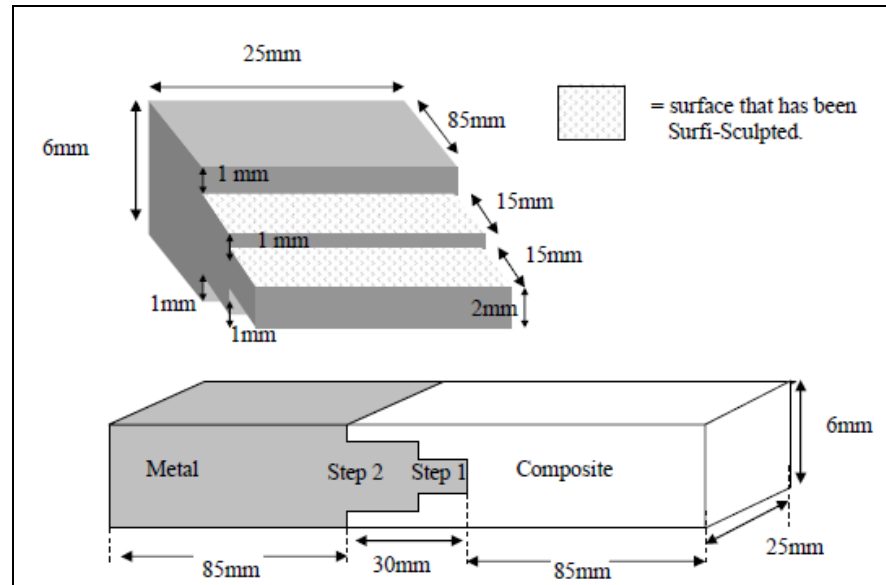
Schematic drawing showing the dimensions of the Comeld™ double step lap joint.
